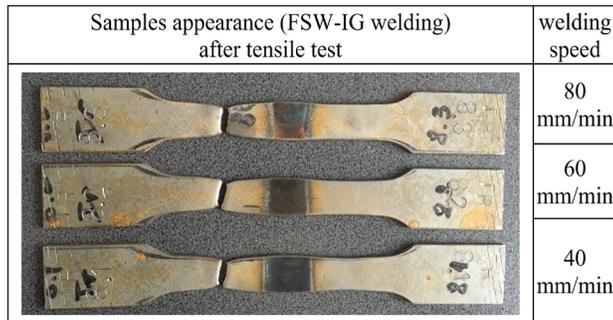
Samples appearance after tensile tests- FSW-IG, DD13 steel
